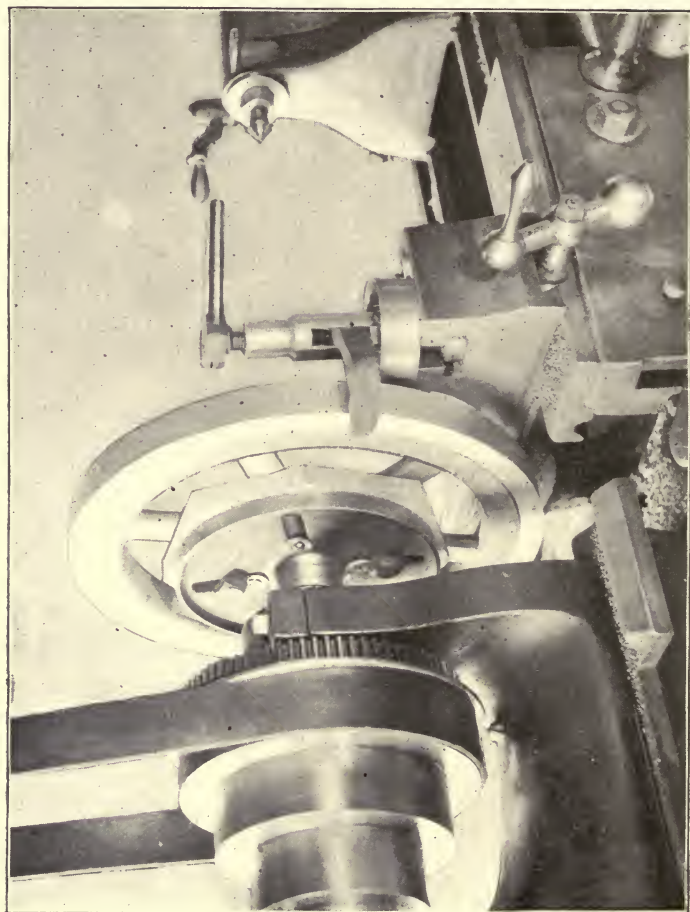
FACING OUTER SIDE OF FLY-WHEEL WITH BENT TOOL.
